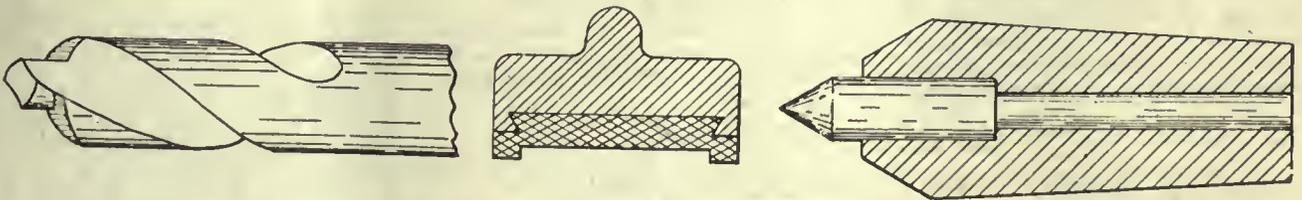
USE FOR OLD DRILLS. FIG. 2—RENEWING WORN ECCENTRICS. FIG. 3—ECONOMICAL LATHE CENTRE.
